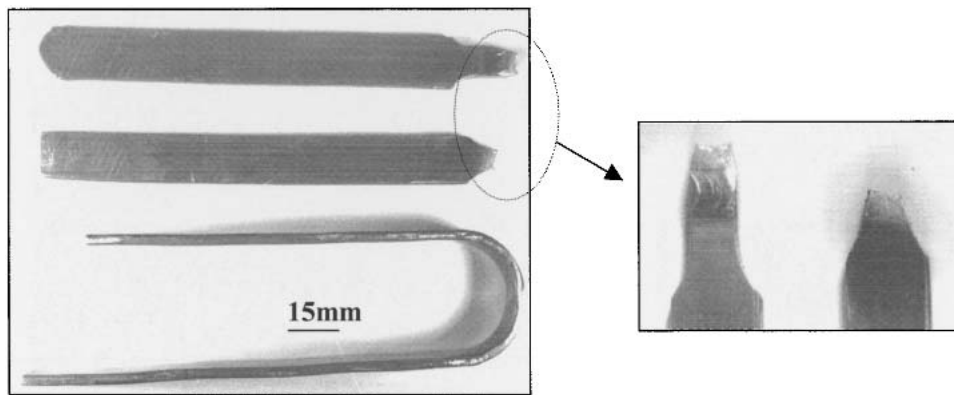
Photograph of tensile and guided bend test specimens. Fracture outside the weld joint is clearly visible.
